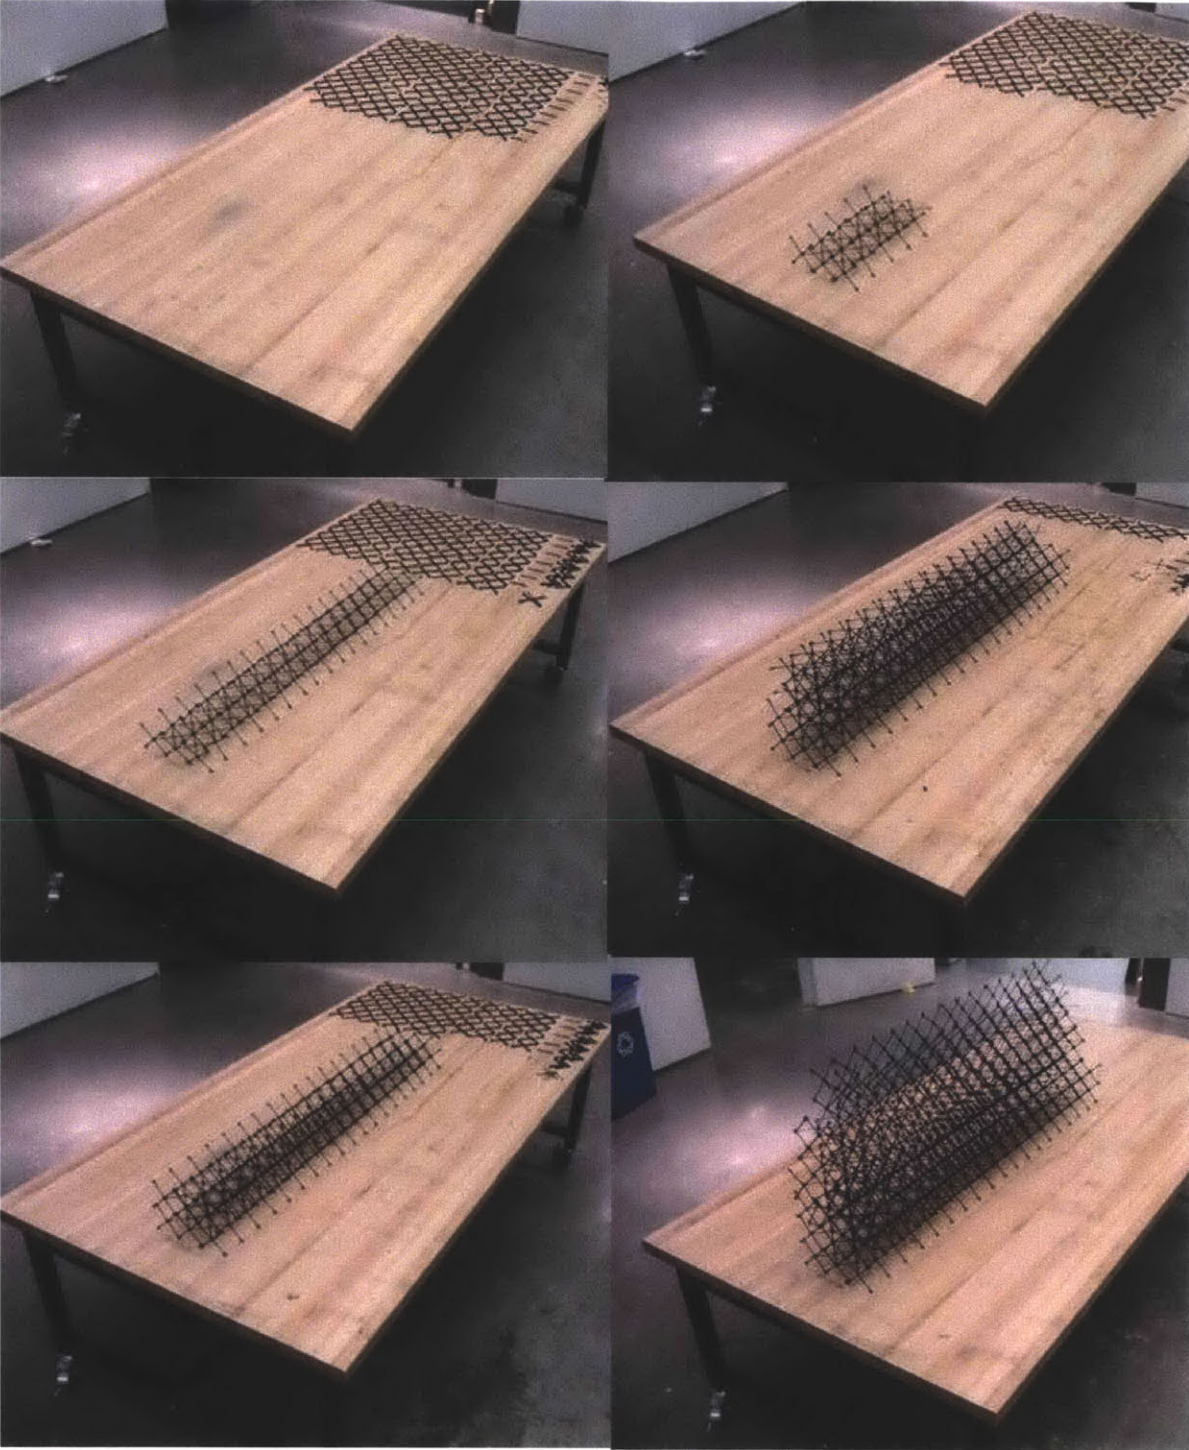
A Digital material assembly featuring the parts, links, and inserts
